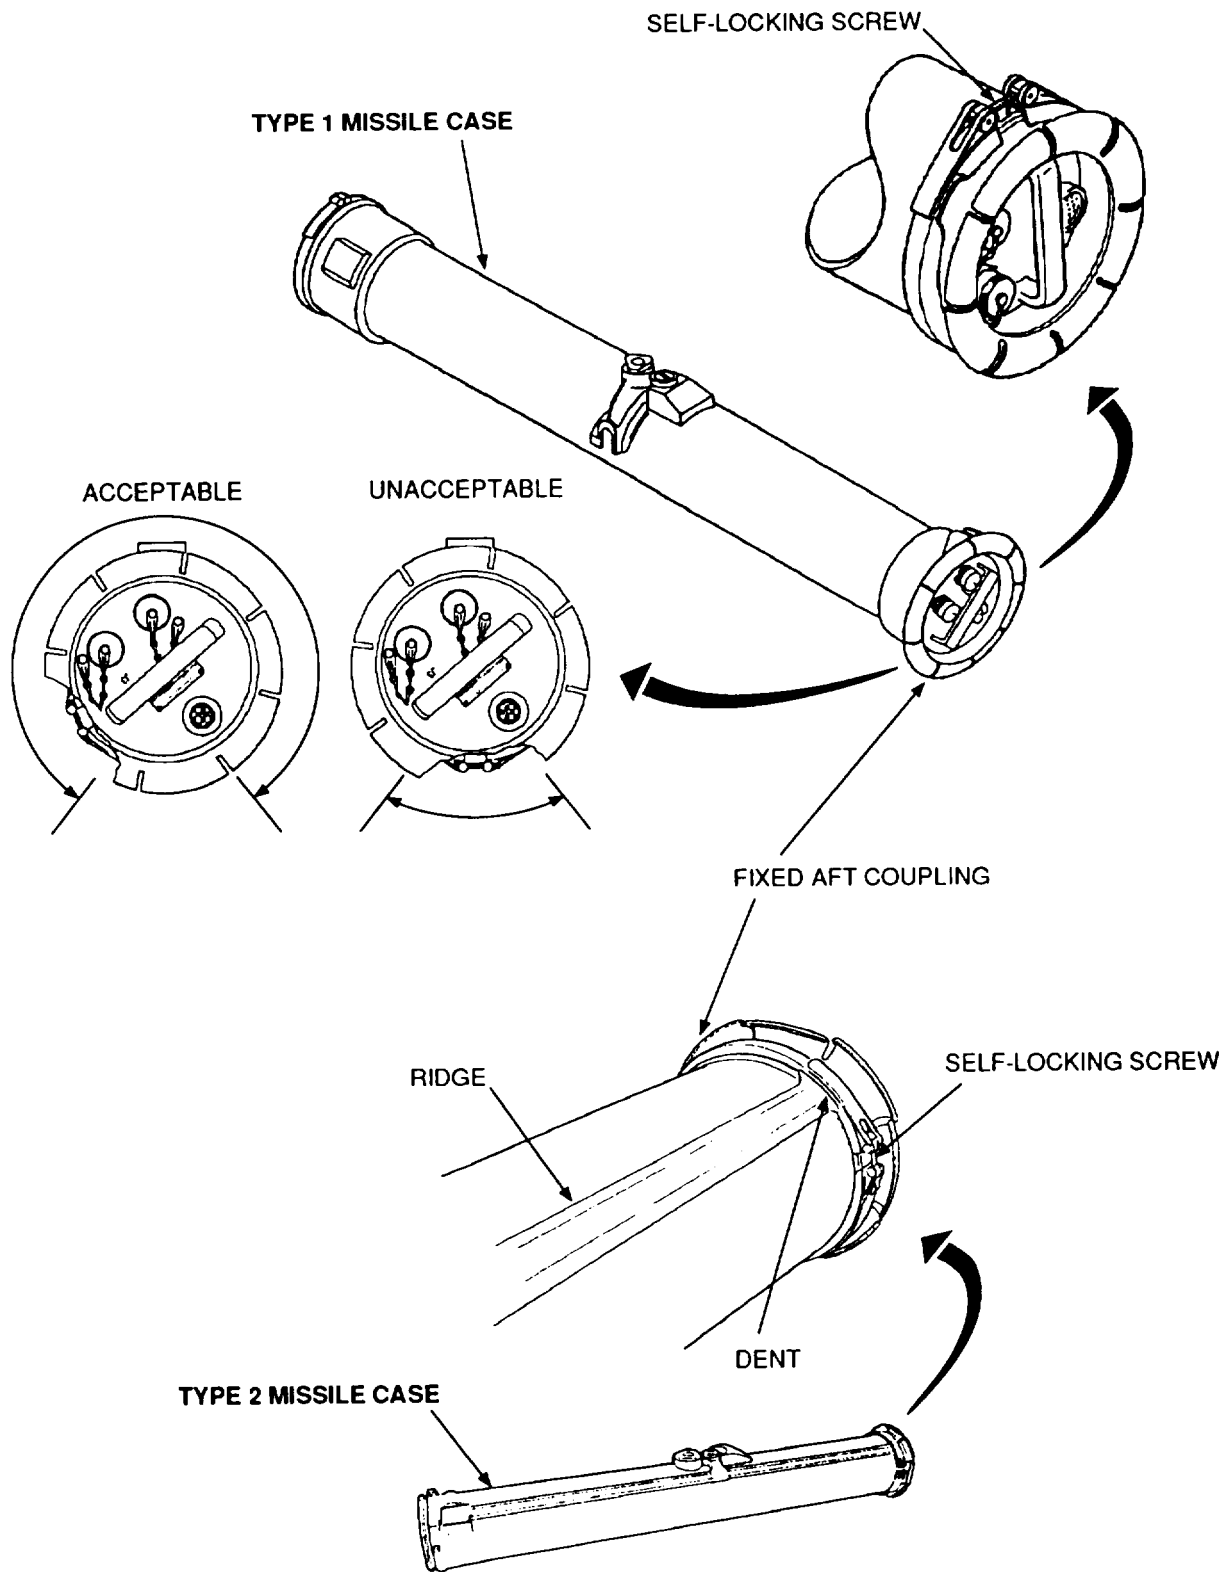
Missile Simulator Inspection Points (Sheet 2 of 2)
